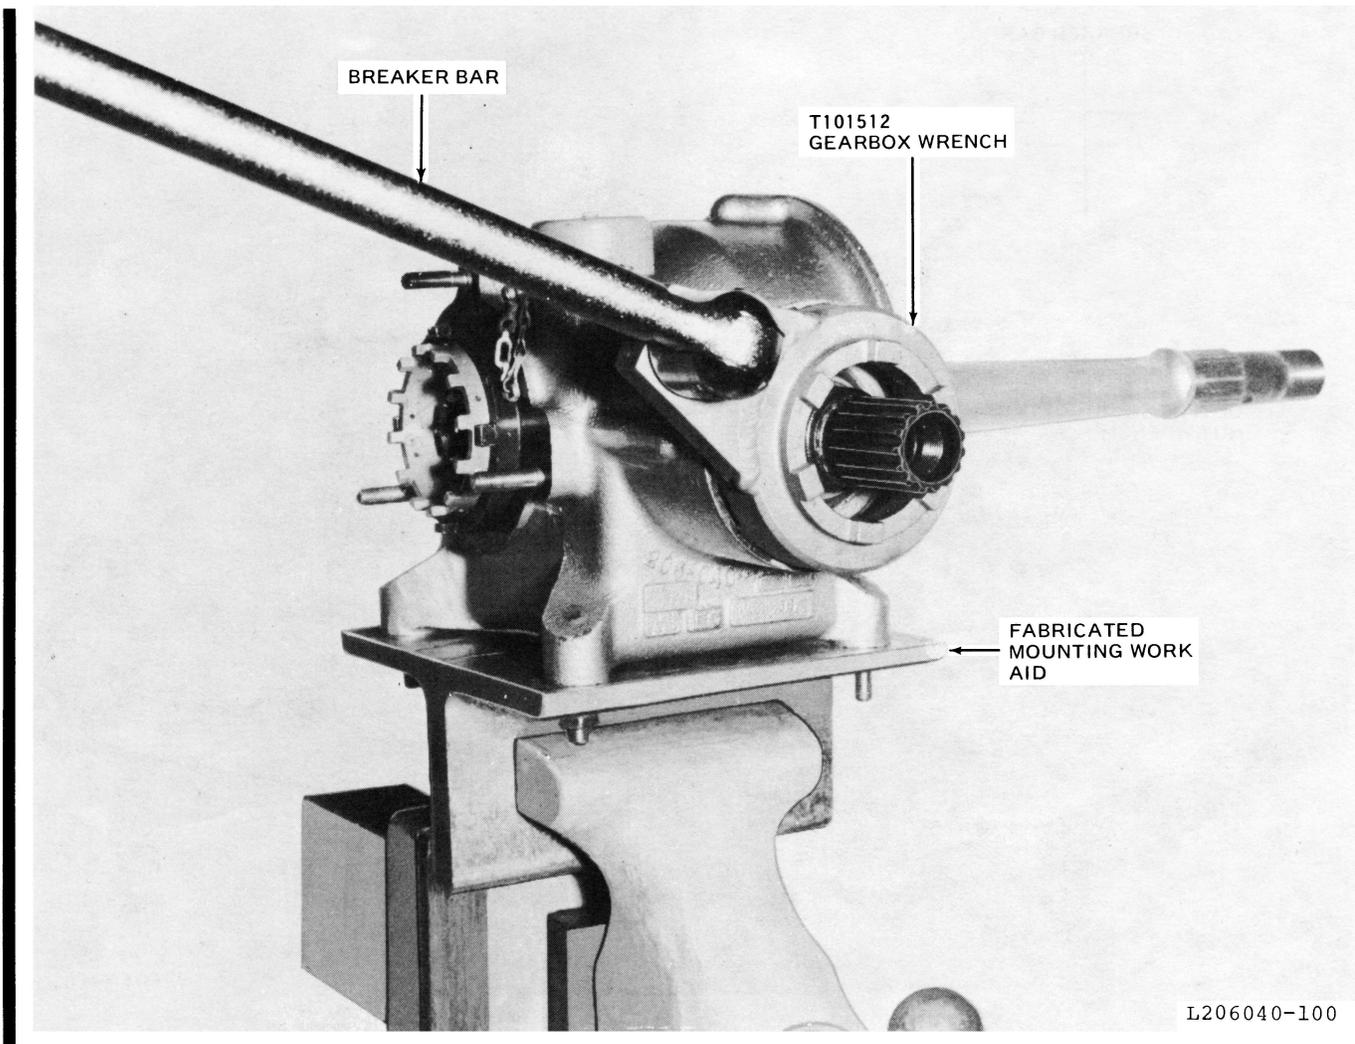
Input pinion outer nut — tool application, T101512 and fabricated mounting work aid.
